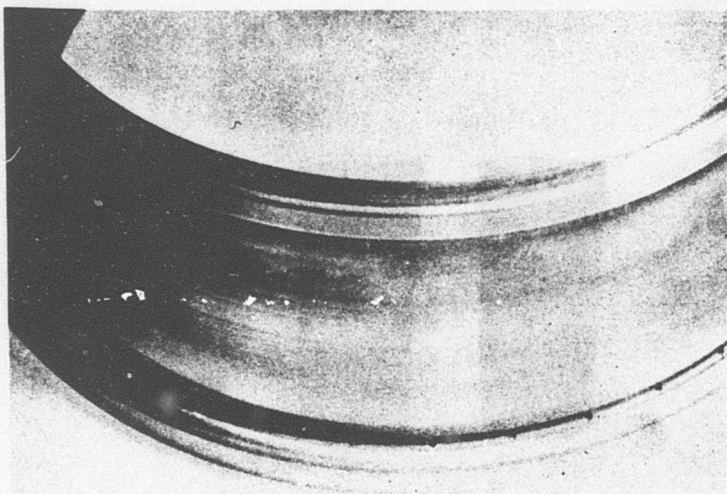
View of Cone Race Surface - Bearing S/N 73-59.
